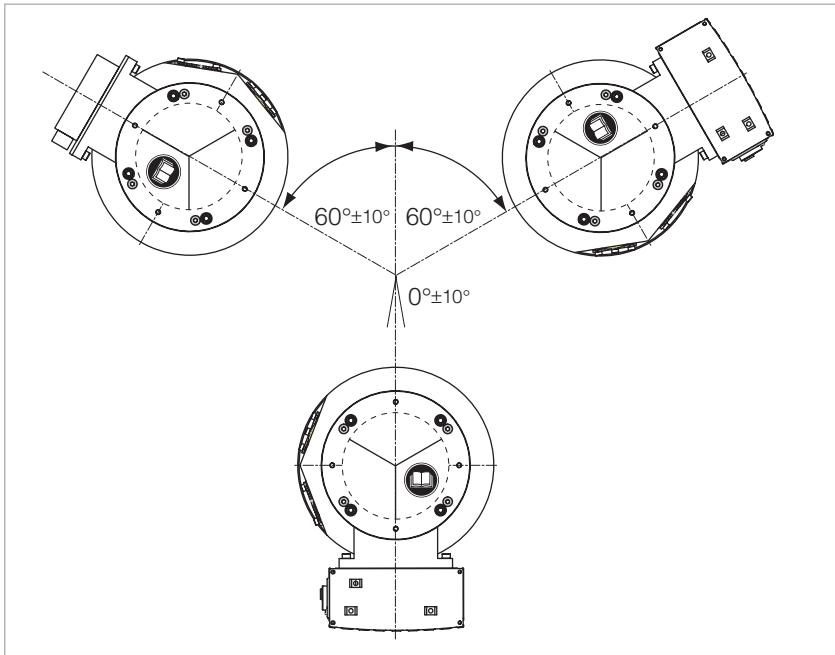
Permissible pump orientation for the MAG W 600 and 700 when mounted horizontally to the vacuum chamber
